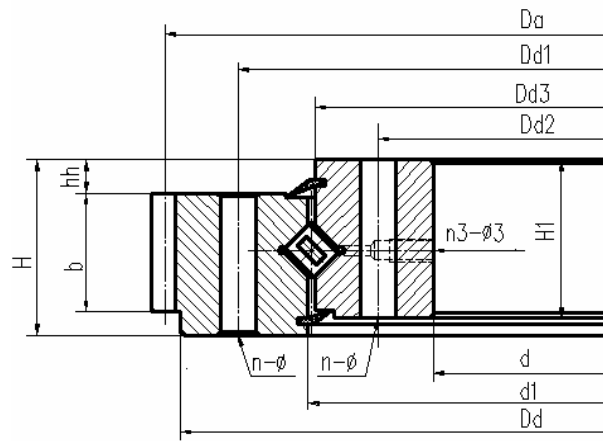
Crossed cylindrical roller slewing bearings with external gears
